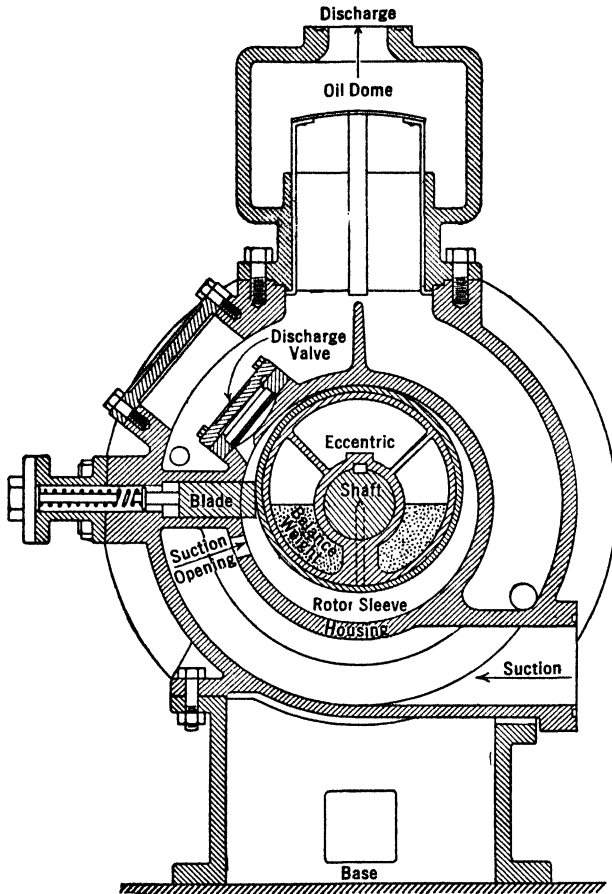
·19. Cross section of a rotary compressor with a sleeve rotor.
